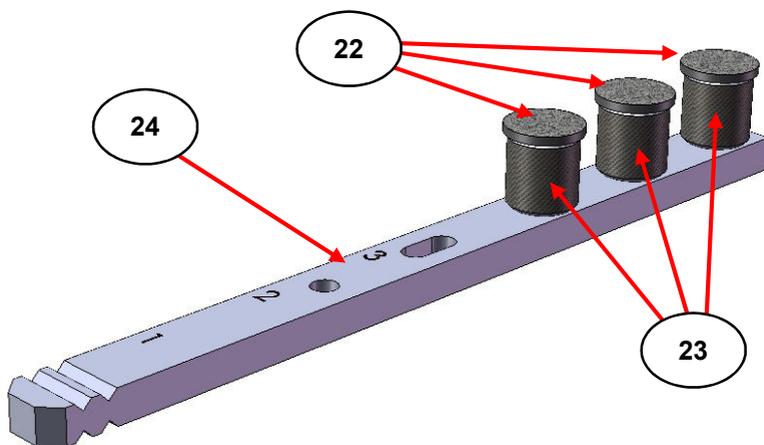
Minidiff Plus Diabrazed Pad Mount Holder Assembly
